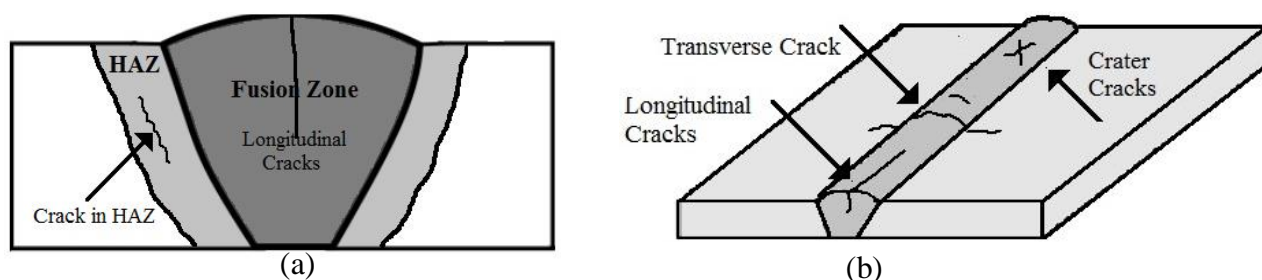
Hot cracks in cross section (a) and surface (b) of a weld (inspired from [10])
